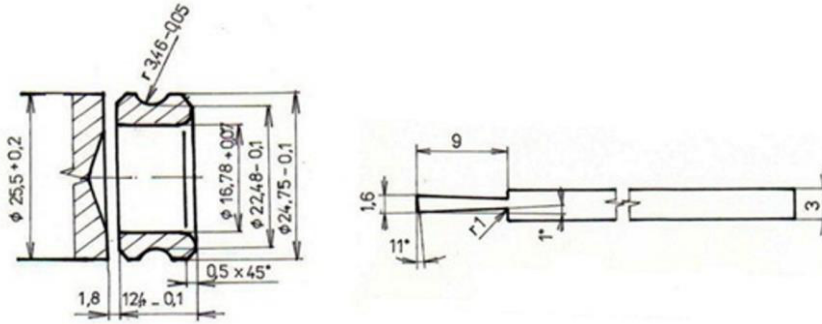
(a) Dimensions of bearing ring; (b) cut-off tool geometry.
